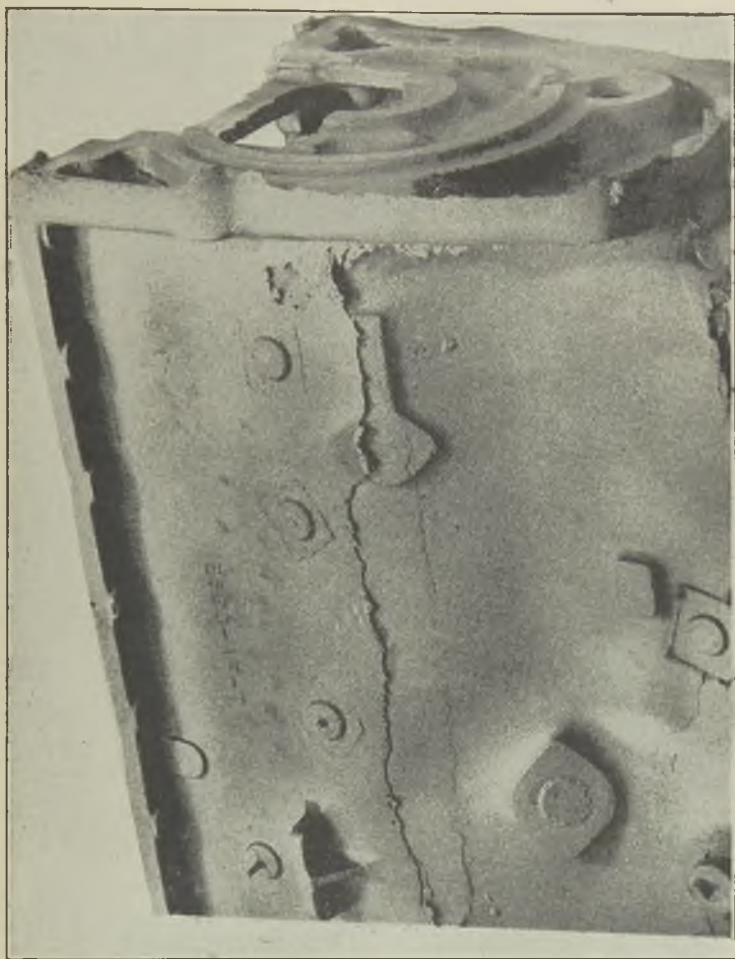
BROKEN MOULD OR DROPPED MOULD.
